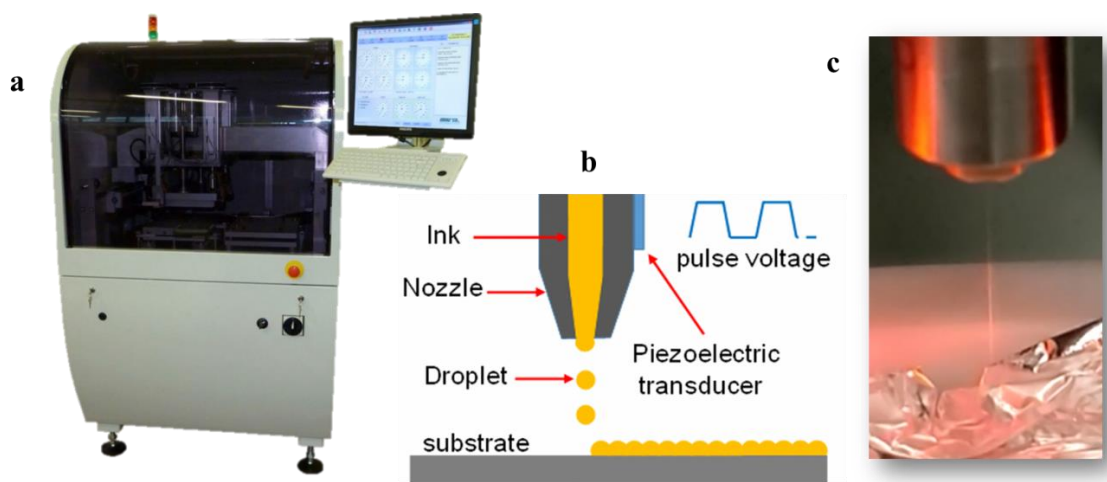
a) Picture of the employed printer. b) Scheme of how the IJP machine prints. c) Picture of the $\text{Ni}(\text{OH})_2$ ink jetting through the printer head.
